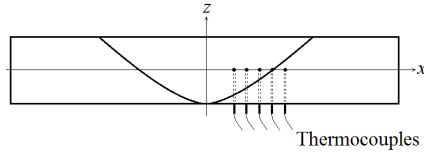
Schematic illustrating the position of thermocouples within the weld cross section.
